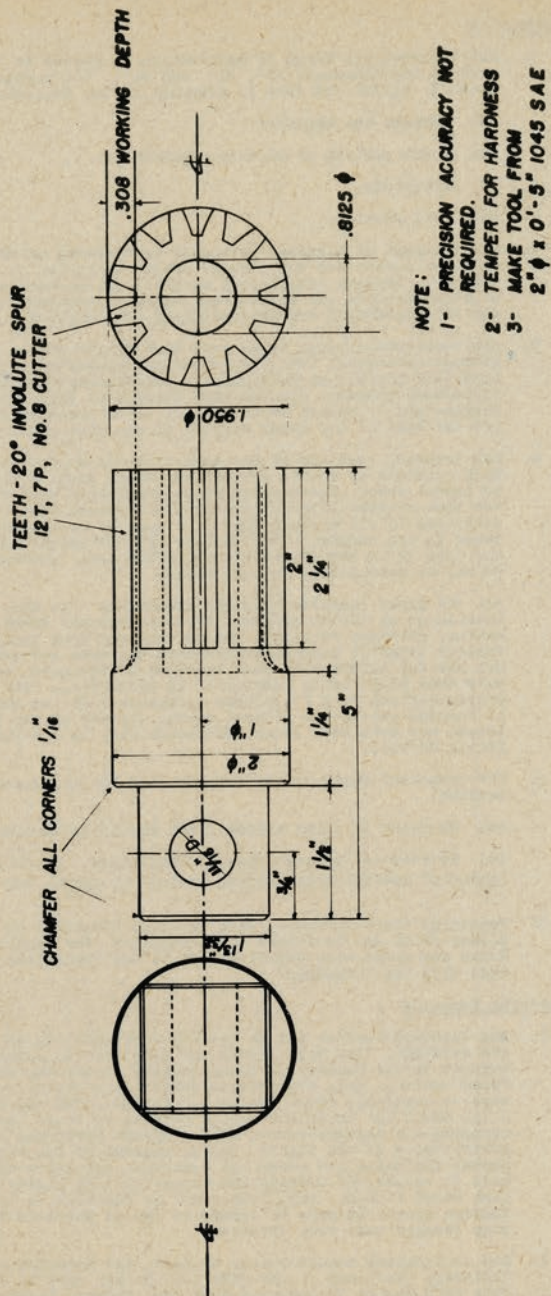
Special Tool For Bayonet Type Locking Ring Used With Type 93
